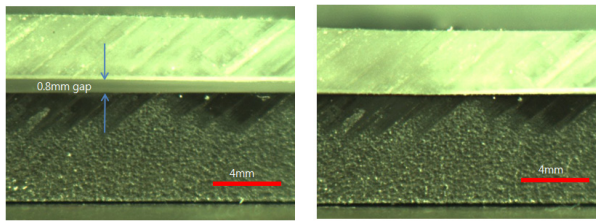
Air gap closing and welding process (10 laps).
